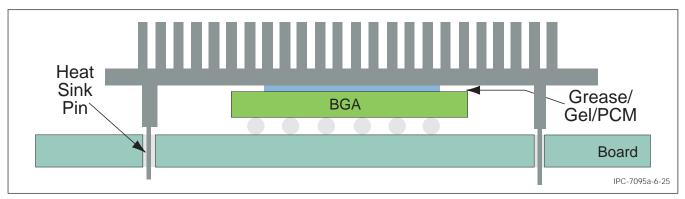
Heat Sink Attached to a BGA by Wave Soldering its Pins in a Through-Hole in the Printed Circuit Board
